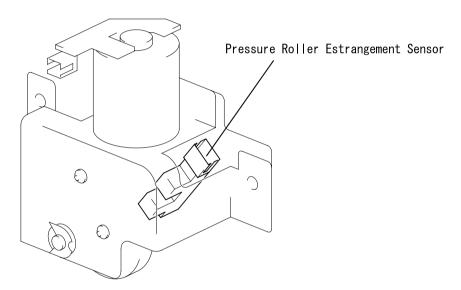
Pressure Roller Estrangement Sensor Removal
